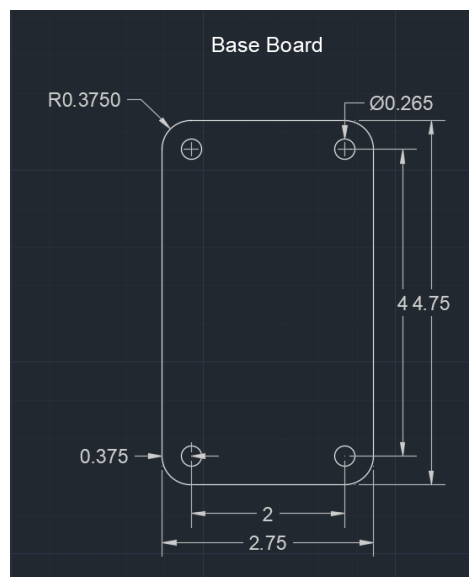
AutoCad Drawing of the Base Component board designed for a 2"x2" grid
